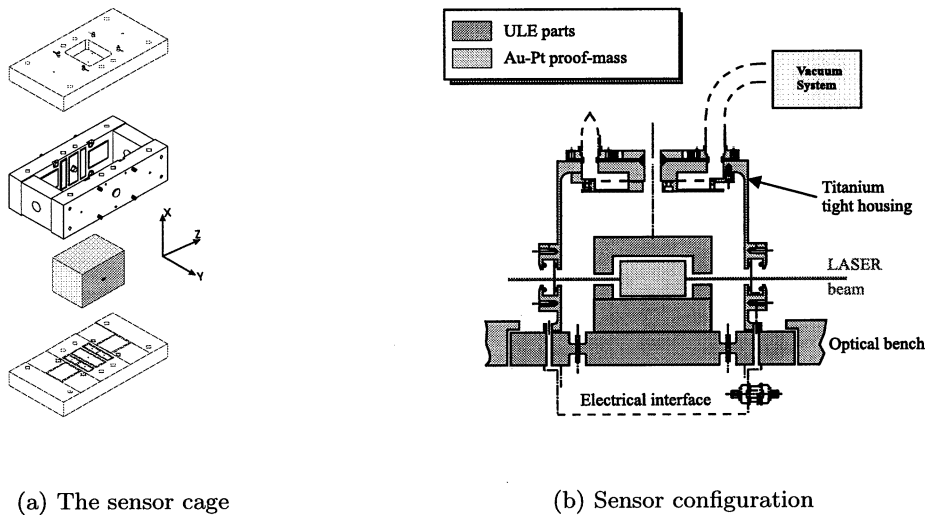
Layout of gravitational sensor: (a) exploded view, (b) with housing.
